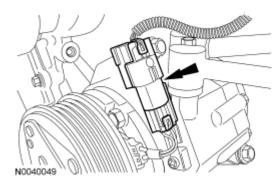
Locating A/C Manifold And Bolt Courtesy of FORD MOTOR CO.
